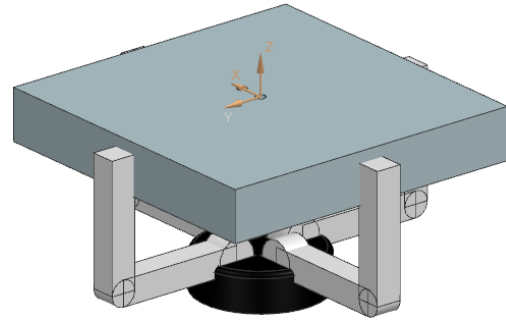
Clamping device with the mounted work piece and T^2 frame.
